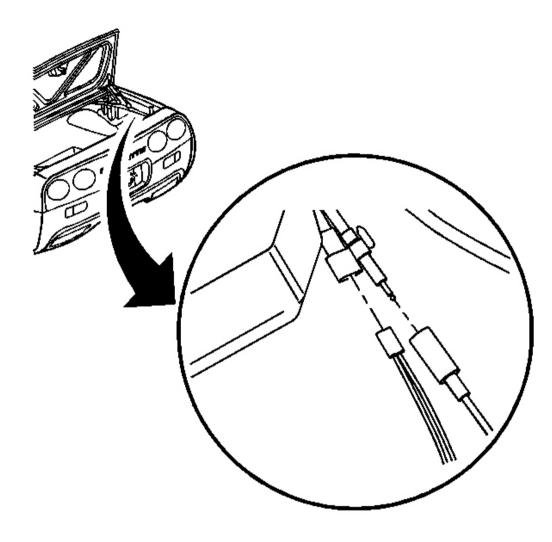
Antenna Electrical Connector At Front Body Wiring Harness Connector Courtesy of GENERAL MOTORS CORP.
